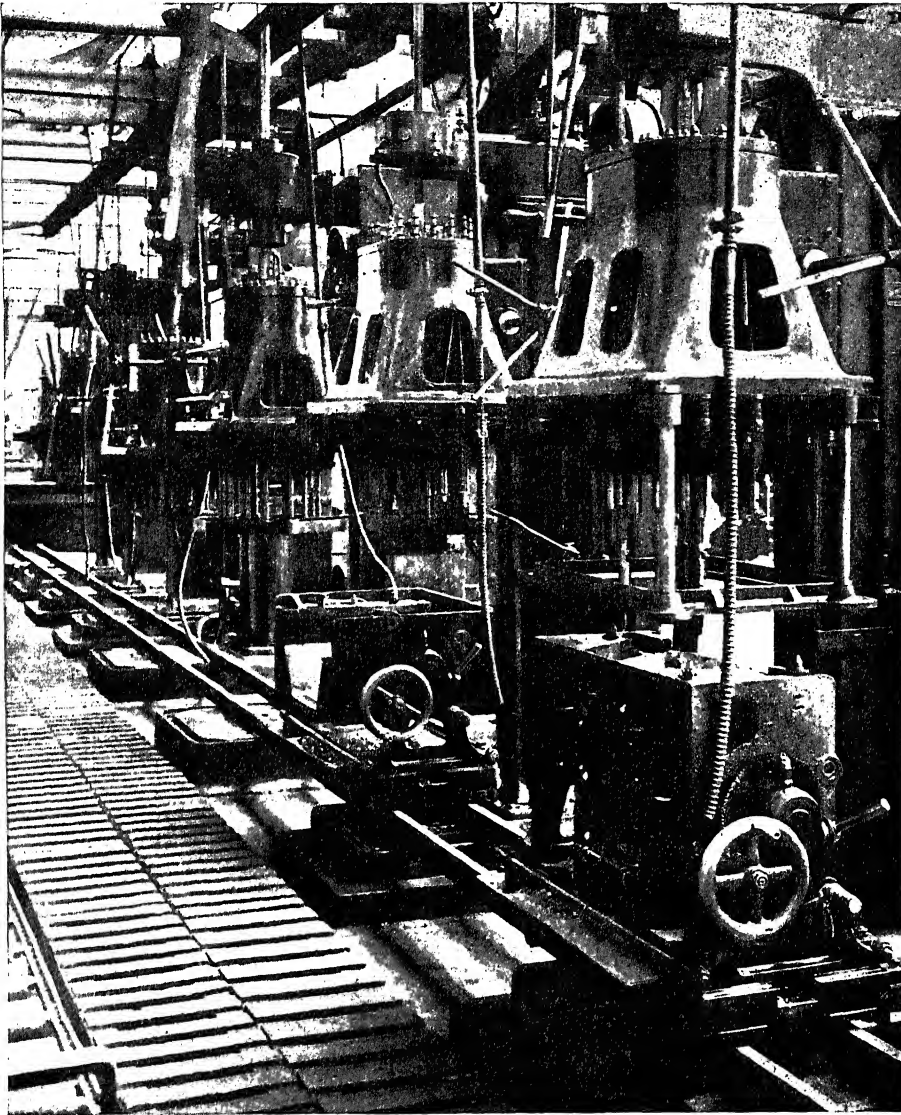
Crank Cases, in Fixtures carried along Tracks, being Drilled and Tapped under "Natco" Multiple-spindle Machines
